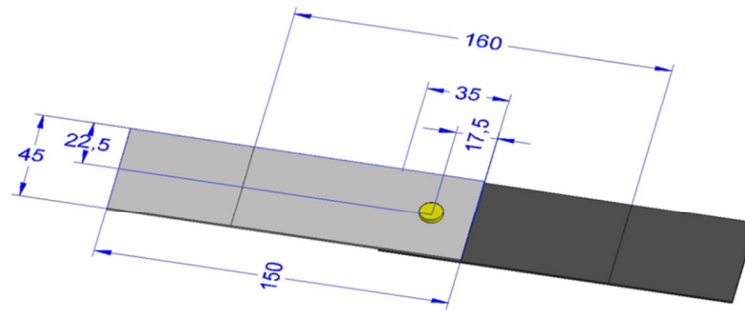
Lap shear specimen geometry for fatigue testing according DIN EN ISO 14273
